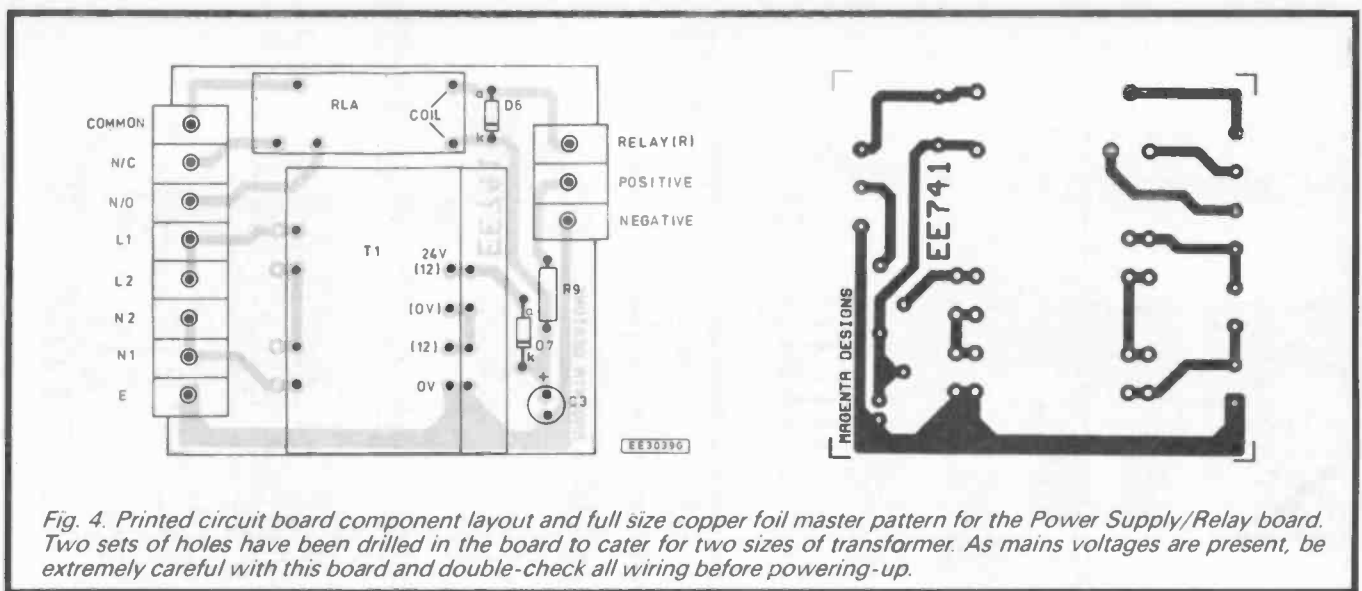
Printed circuit board component layout and full size copper foil master pattern for the Power Supply/Relay board. Two sets of holes have been drilled in the board to cater for two sizes of transformer. As mains voltages are present, be extremely careful with this board and double-check all wiring before powering-up.
